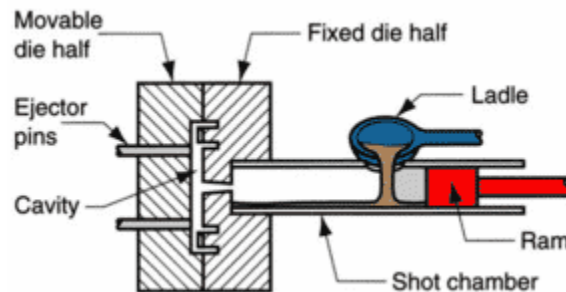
Cold chamber die casting ladle operation example (*Hot Chamber vs. Cold Chamber Die Casting*, 2021)
